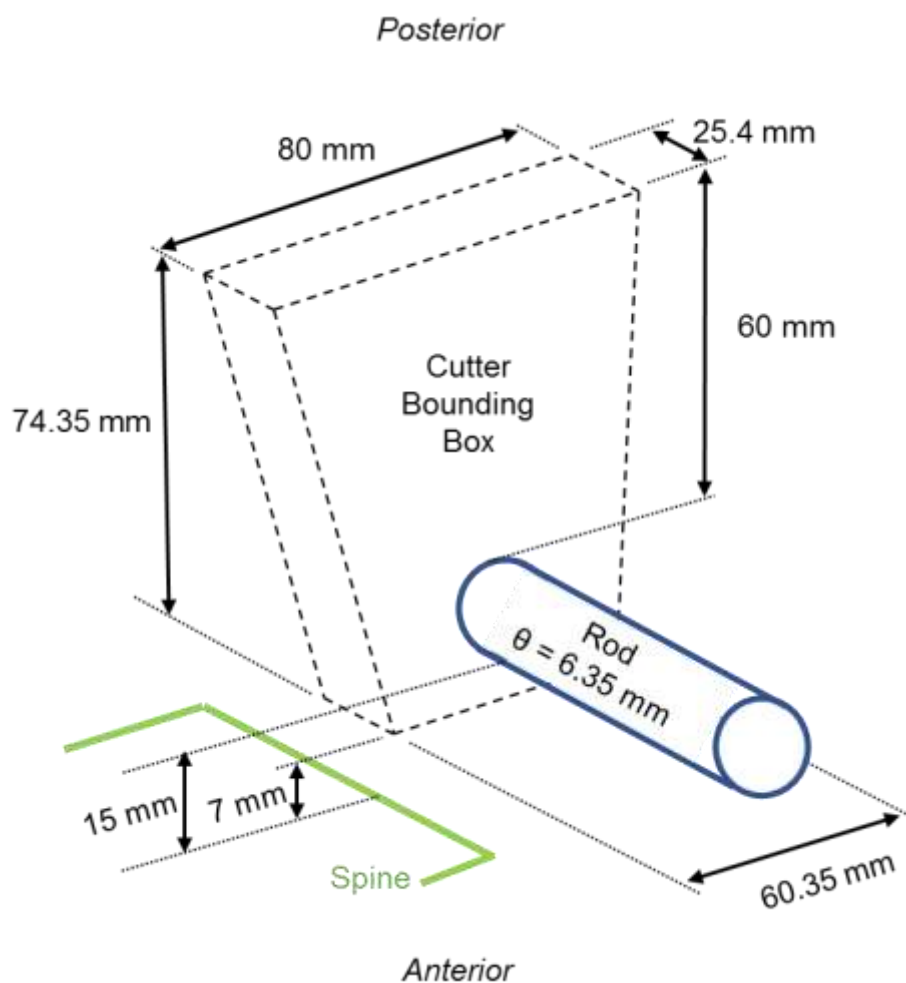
Dimensions of space available for fitting the in-situ cutter into the exposed spine.
